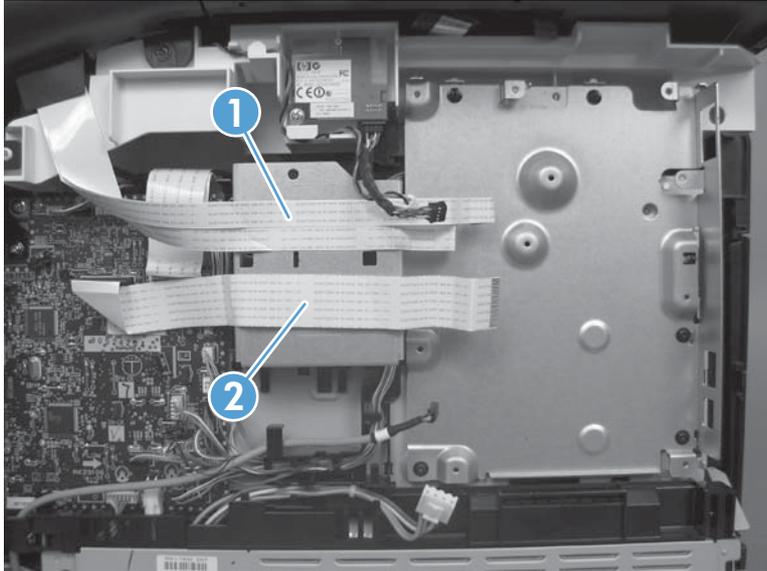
Remove the formatter PCA, fax card PCA, and support bracket (5 of 8)
